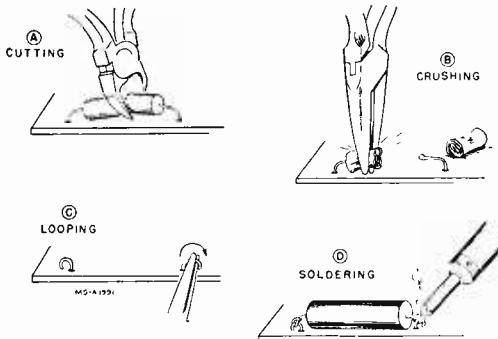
One method of replacing parts in a printed circuit receiver. A, Cutting the part; B, Crushing the part; C, Looping the remaining leads; D, Soldering the new part into place.
